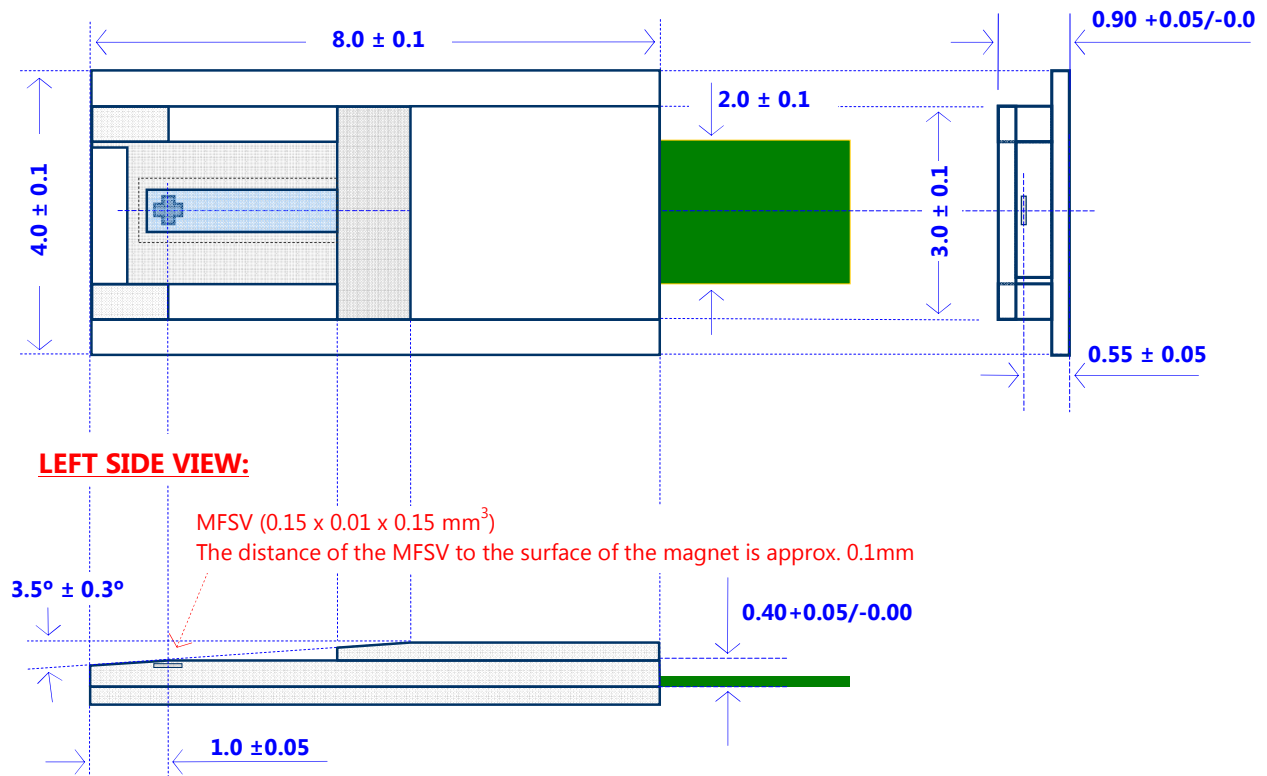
Dimensions and tolerances of the modified 03C Hall probe
